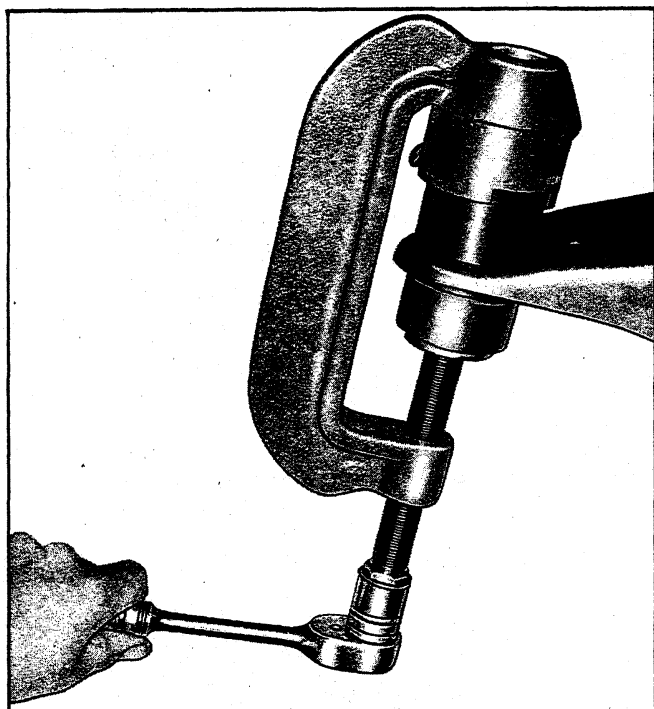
Installing Lower Ball Joint - Chevelle & Camaro
